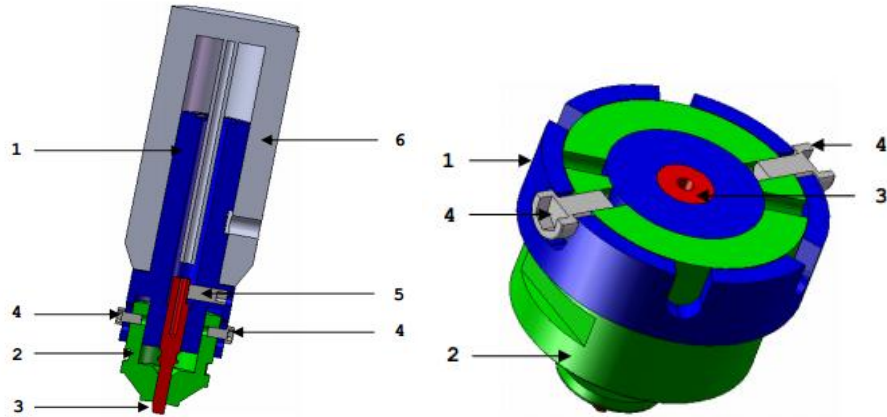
iSTIRtool\_v3 tool. (a) Longitudinal section view, (b) Cross section view. 1 - Tool body; 2 - Probe; 3 - Shoulder; 4 - Shoulder fixation screw; 5 - Probe fixation screw; 6 - Machine spindle shaft [49].
